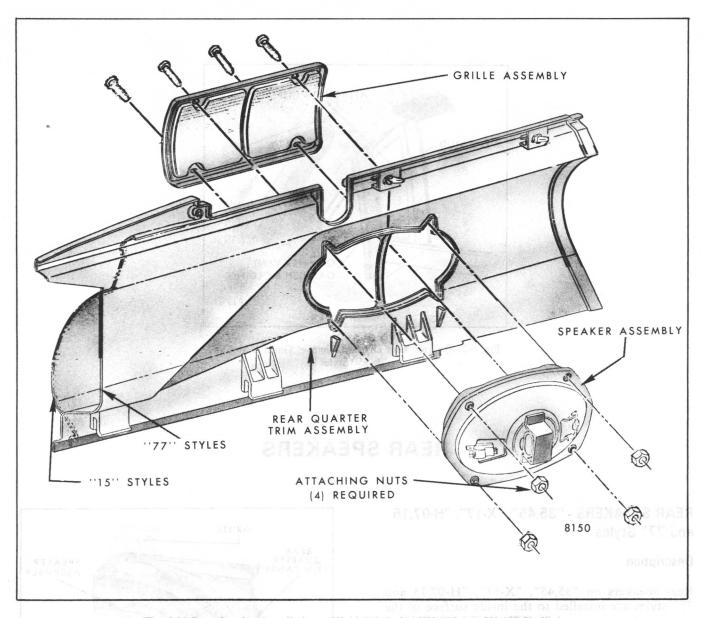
Rear Speaker Installation - "H-15,77" Styles ("H-07" and "X-17" Similar)
